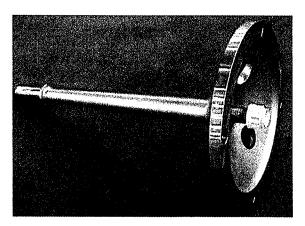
Piston Damper Rod Assembly w/Damper Adapter
